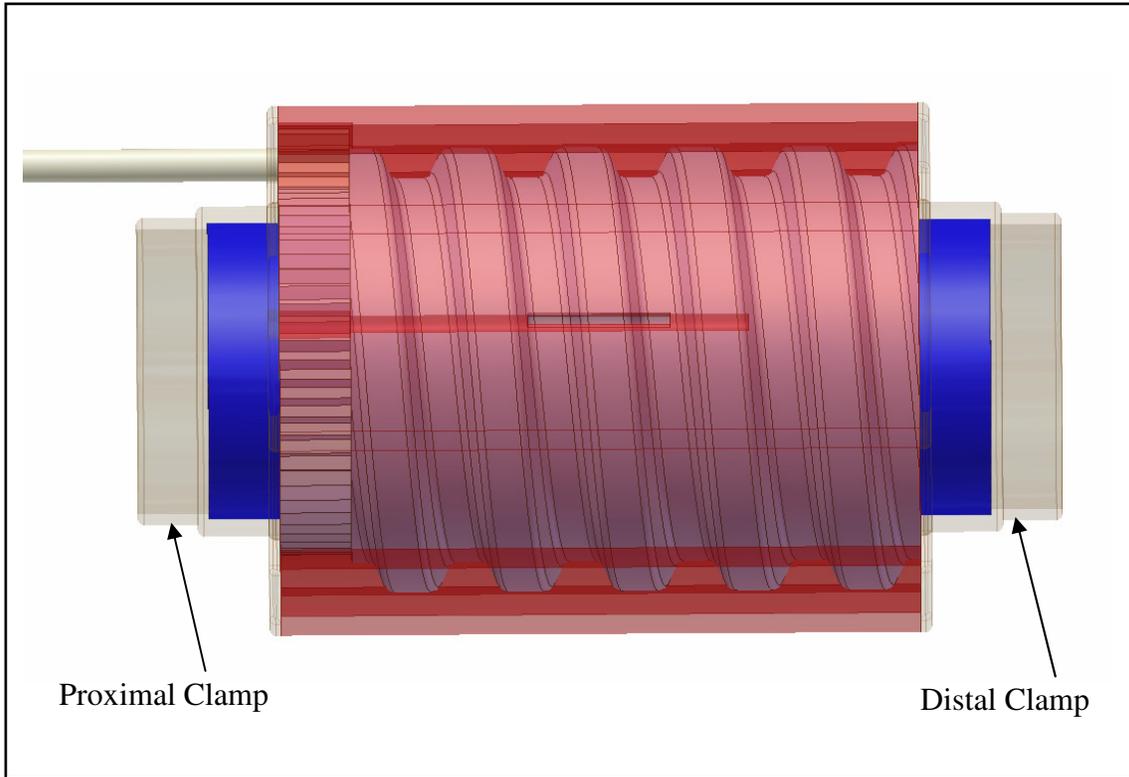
Isometric drawing of the outer cylinder and internal parts.
